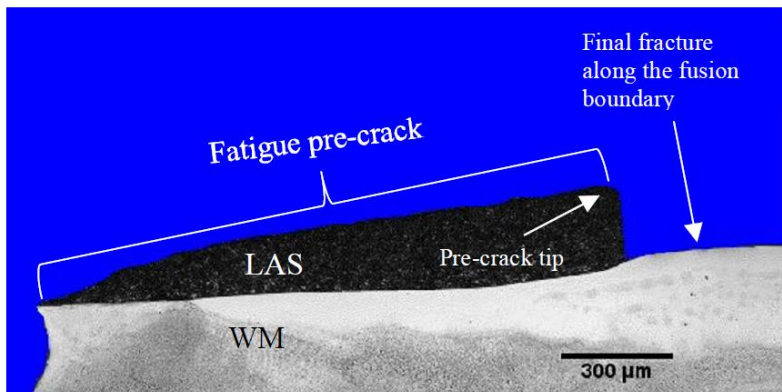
Cross-section of a high fracture toughness specimen in the crack growth direction.
